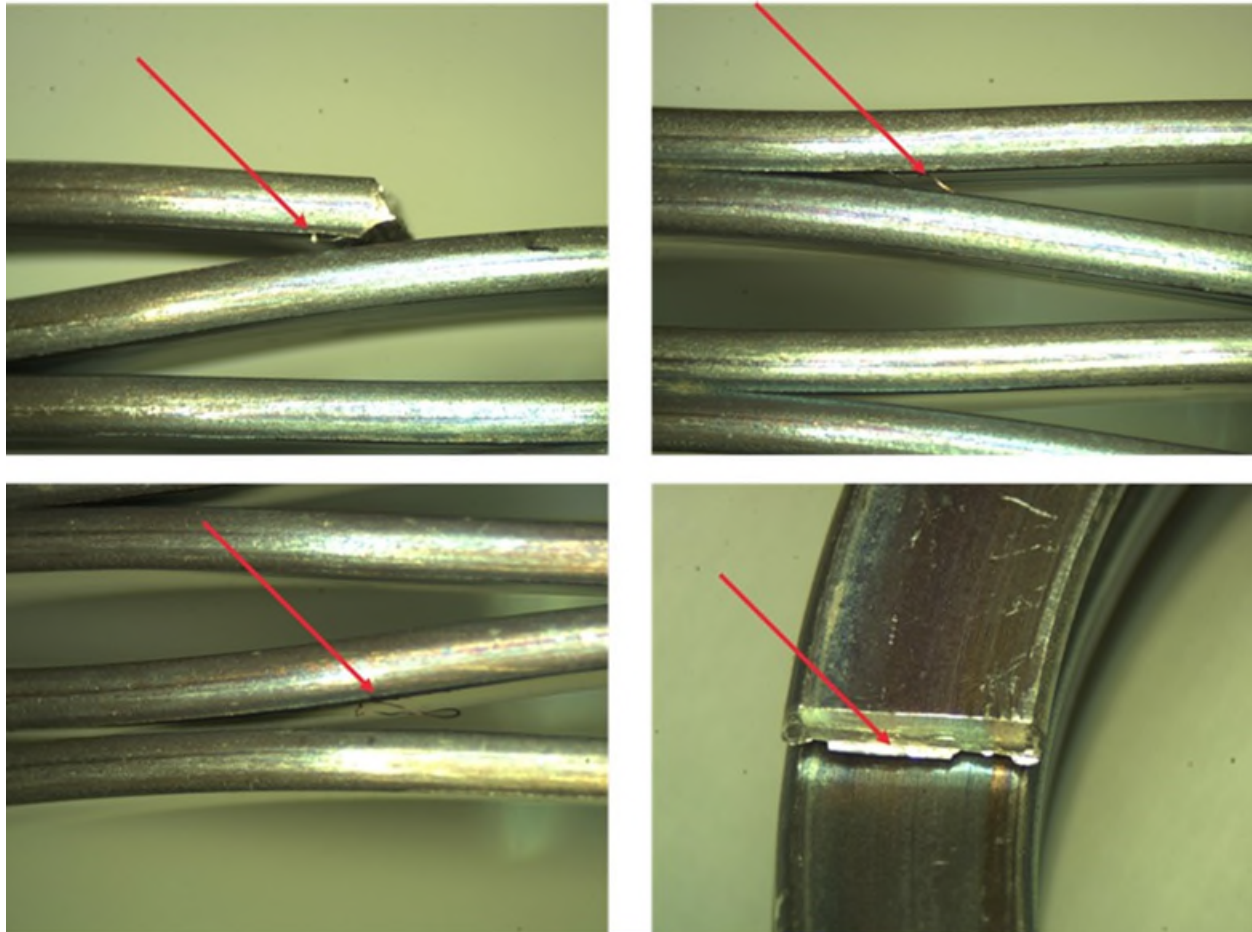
Wave spring with burrs on the sheared end and along the length of the spring.
